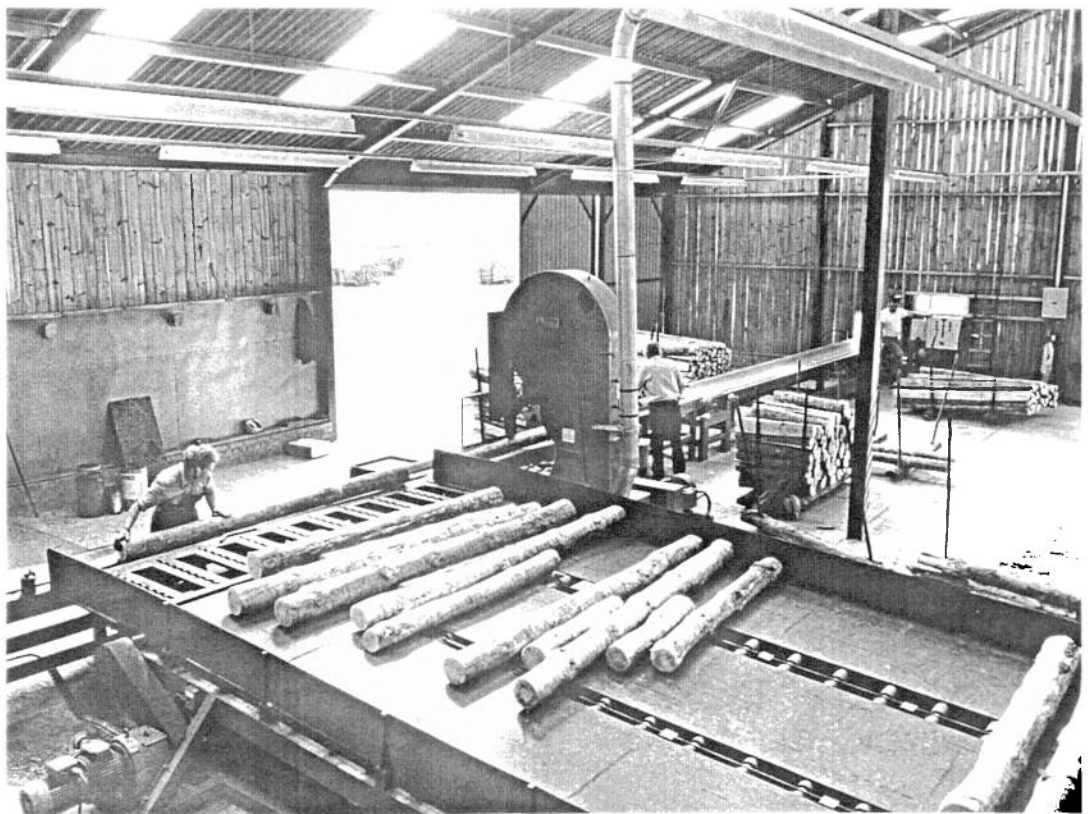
Cross transfer conveyor, splitting bandsaw and sorting bay. Control station at end wall controlled outside sorting bays for larger products.
